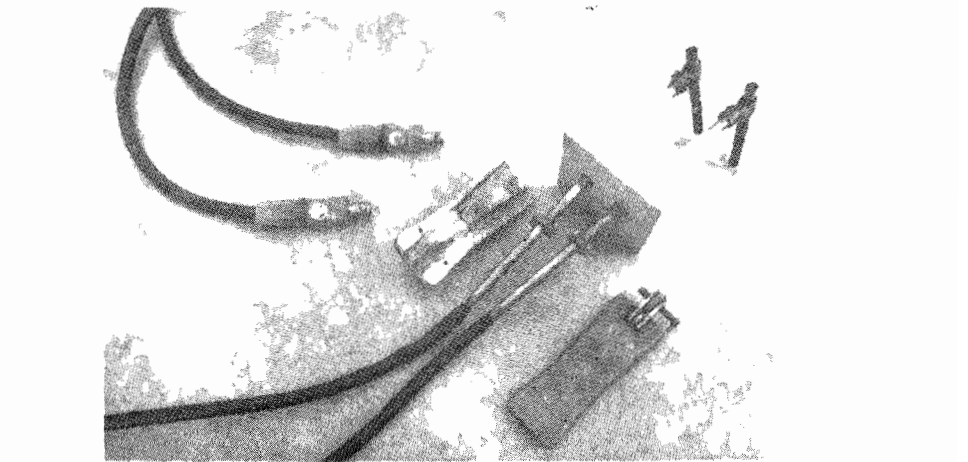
Twin carbon-arc torch disassembled. Basic materials used for parts are 25 mm² multi-strand copper cable, 10 mm in diameter copper tubing, brass rod, asbestos sheet, plastic sheet, and carbon electrodes.
